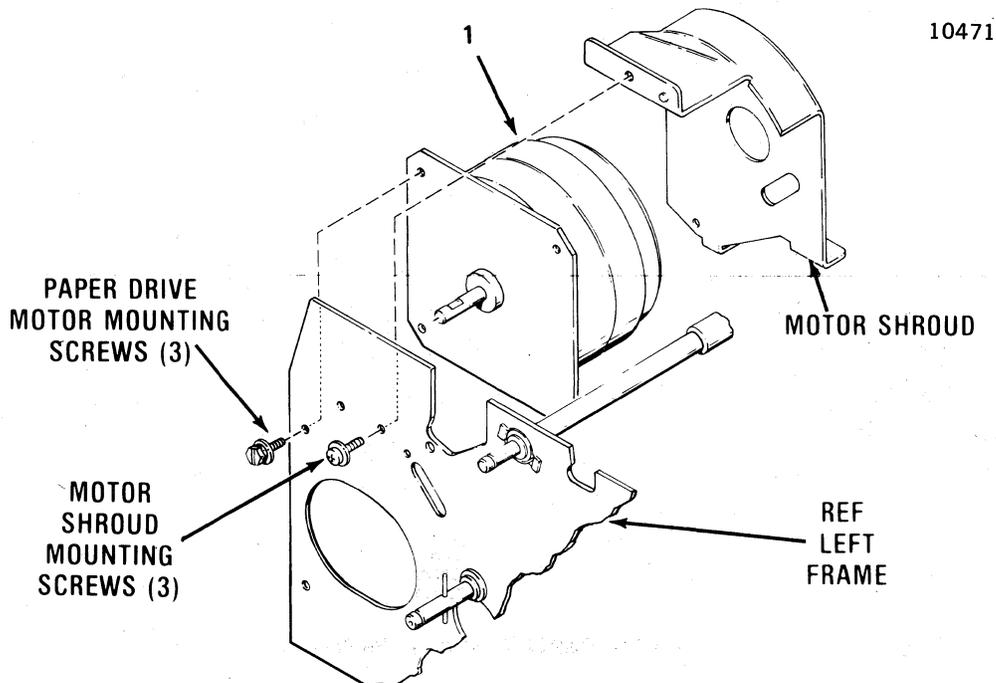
REMOVAL/REPLACEMENT, PAPER DRIVE MOTOR
